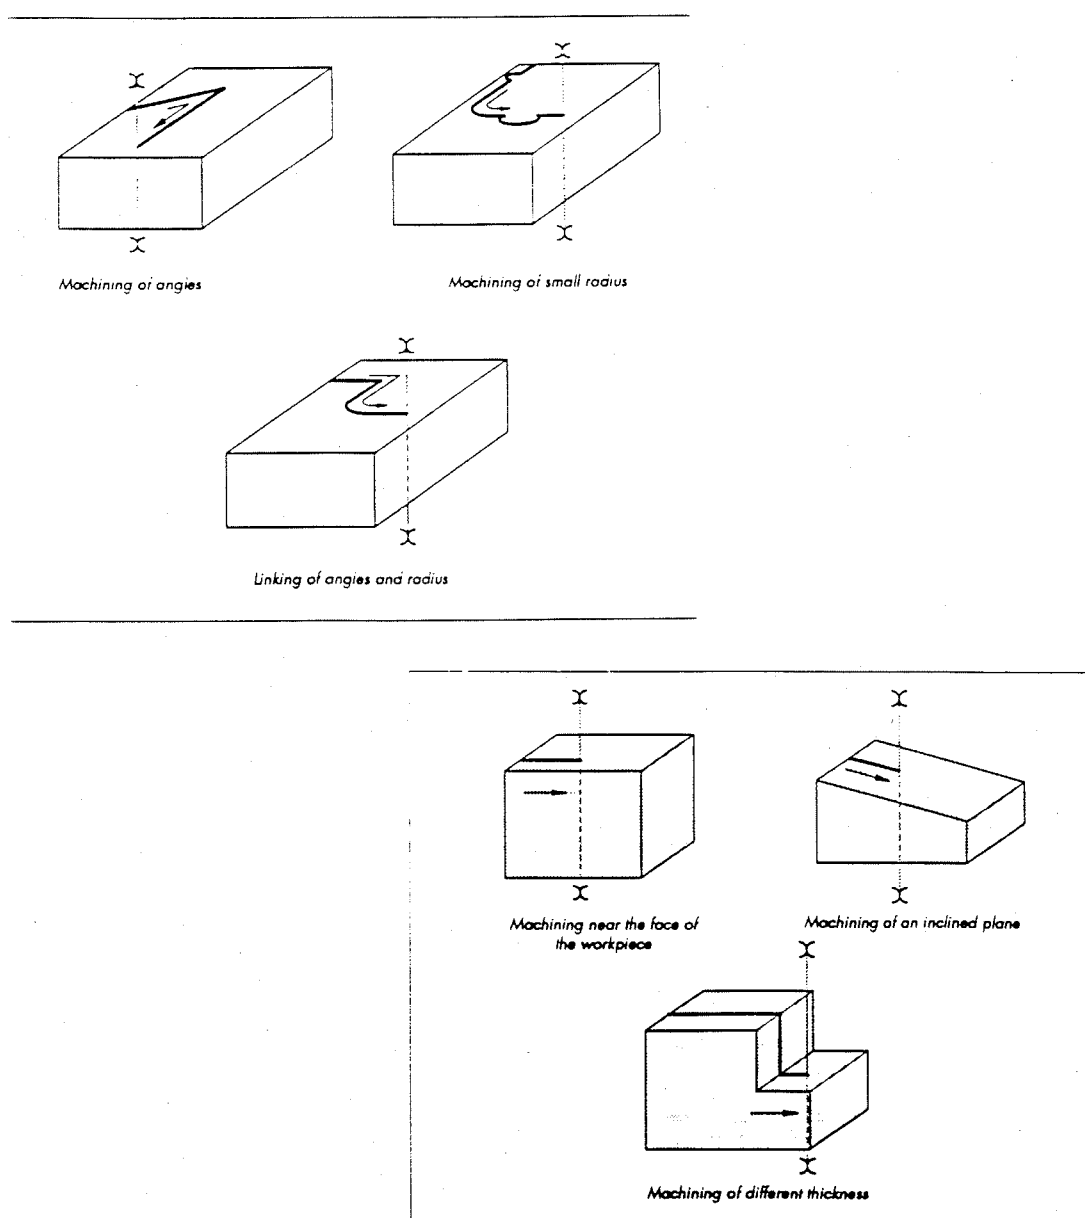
Machining Examples on the ROBOFIL 2000 wire cutting intelligent machine.
